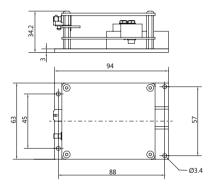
Outline drawing of DPS series drivers with conductive pad
